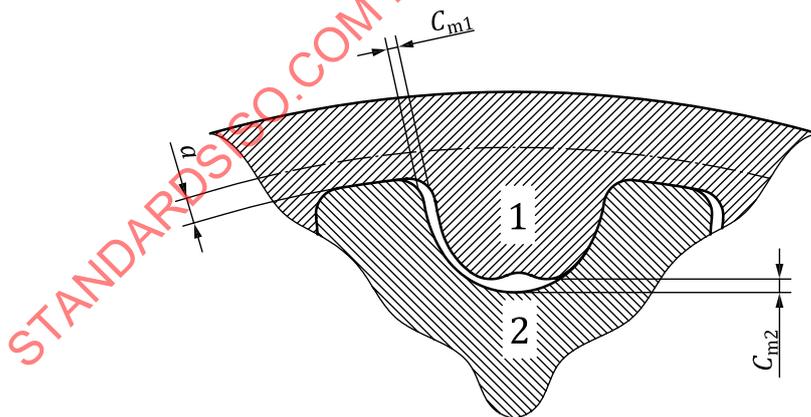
Clearance between measuring pulley and belt types YH and ZH (see Table 9)
